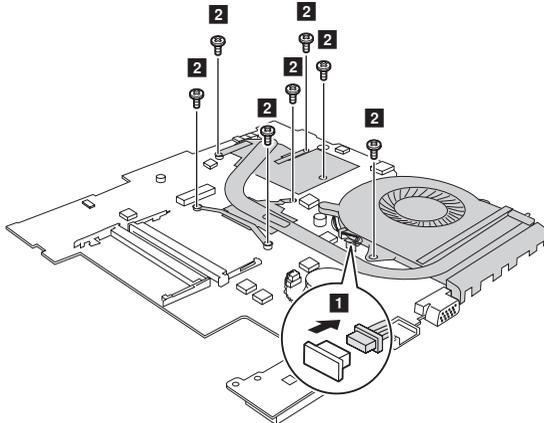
Removal steps of fan assembly and heat sink assembly (continued)
